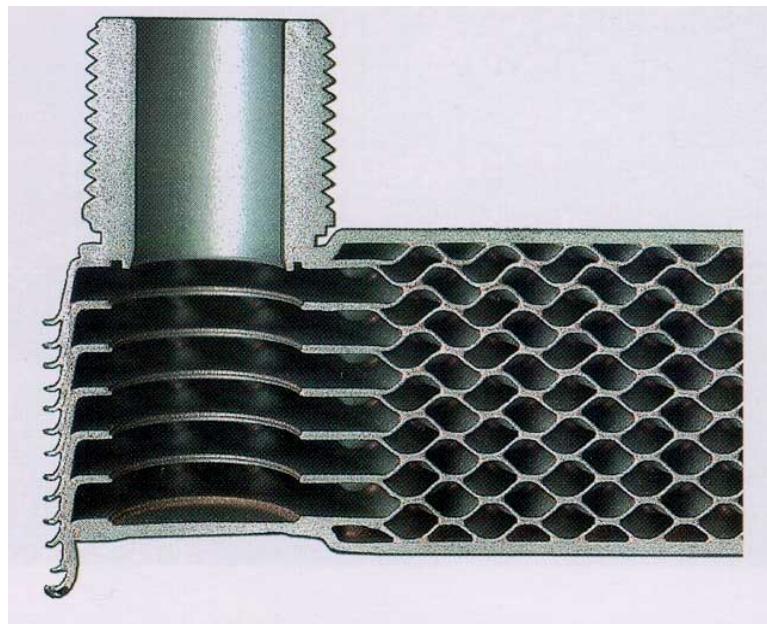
Section Through a Brazed Plate Heat Exchanger
